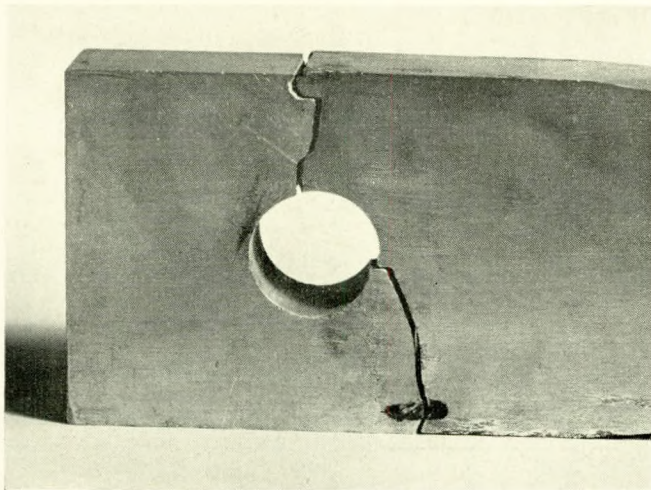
Pinjoint specimen fractured from a fretting mark
